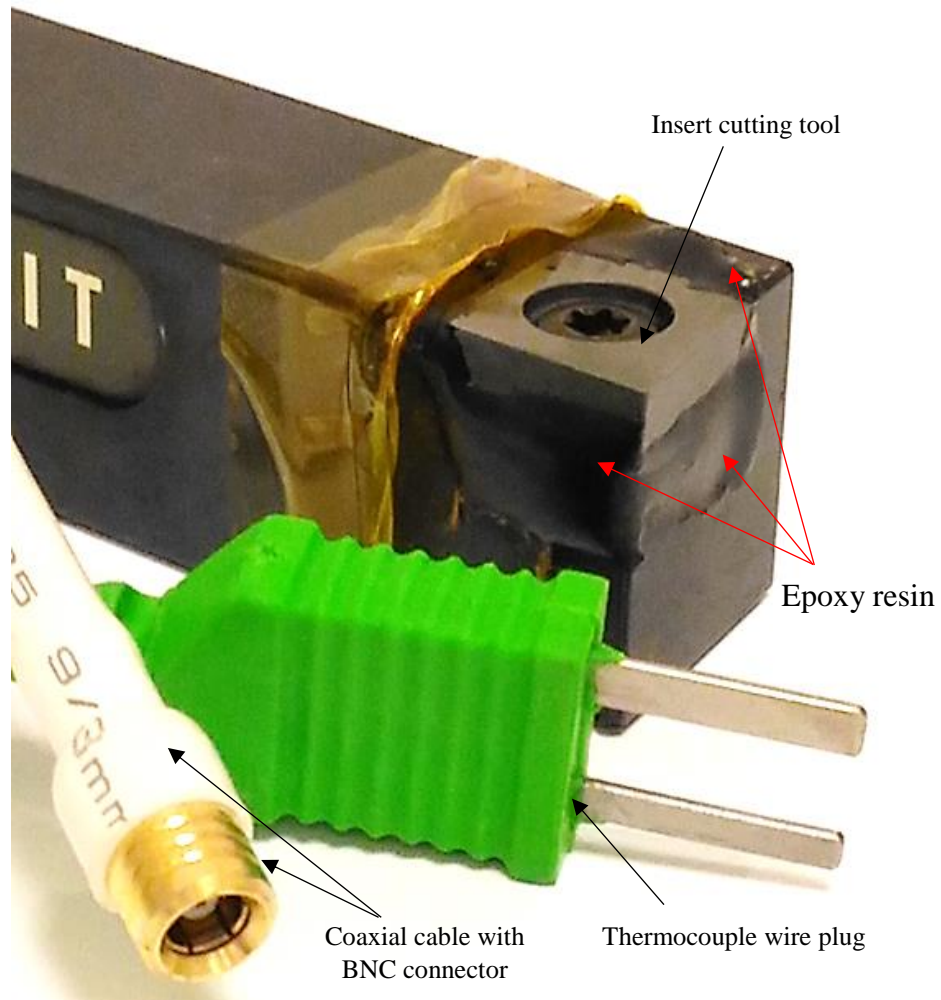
Cutting tool instrumented with an ultrasonic element and thermocouple
